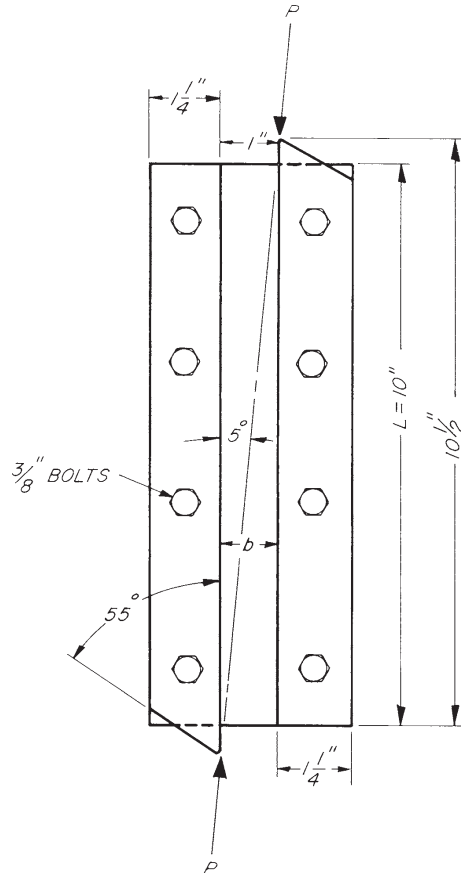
Detail of Loading Rails Used with Edgewise Shear Specimen
